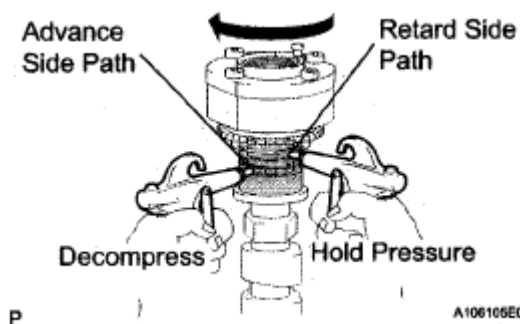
Checking Camshaft Timing Exhaust Gear Turns In Retard Direction
